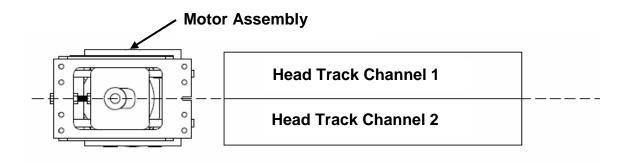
Motor Assembly Centered Between Two Head Track Channels
